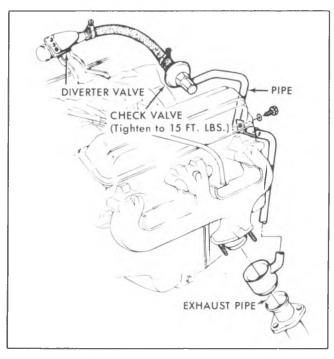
E-38-Air Pipe Installation G10 and 350 V8 Cal
